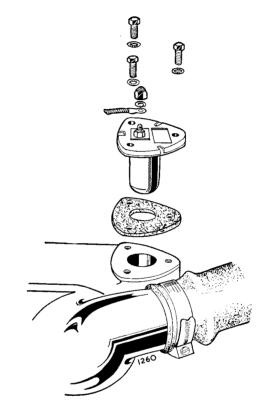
Removal of the auxiliary starting carburetter thermostatic switch.
